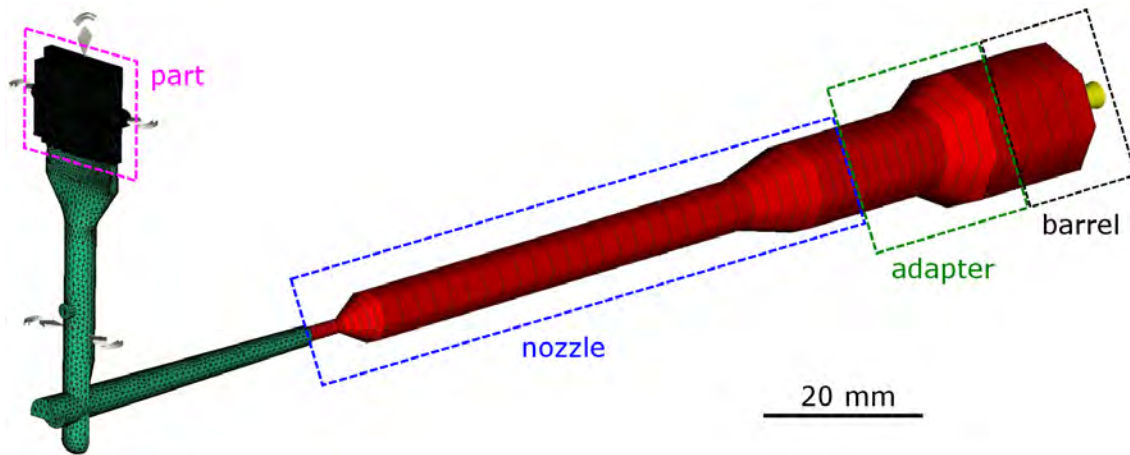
Meshed model of the part with feed system, additional machine geometry modeled as hot runner, and pointers indicating the venting channels. The geometry resembles the actual nozzle and barrel of the machine.
